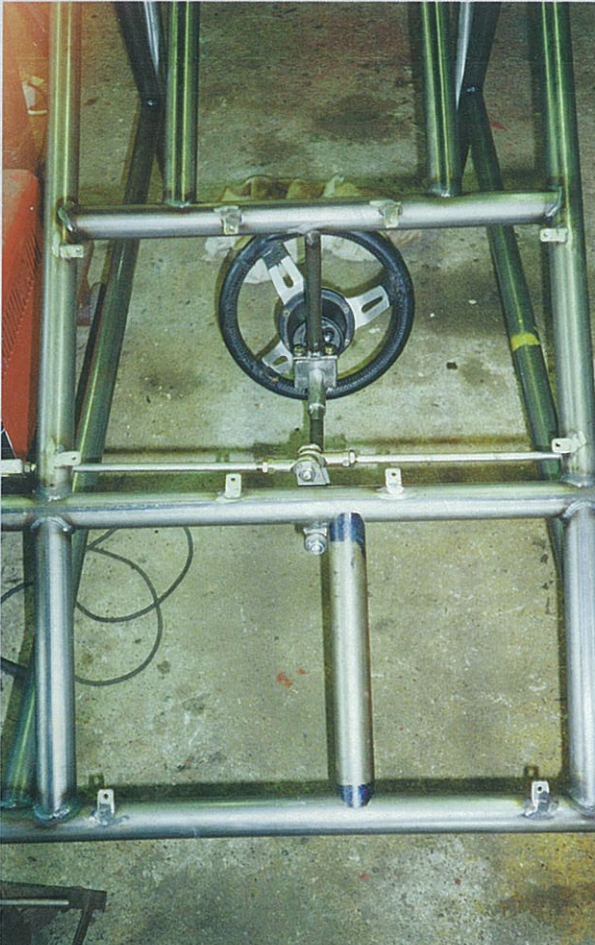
Starting to fully weld the frame. Remember to weld alternate sides to minimise distortion. Spot the deliberate mistake – the welder should be wearing thick gloves! (Steve Williams)
